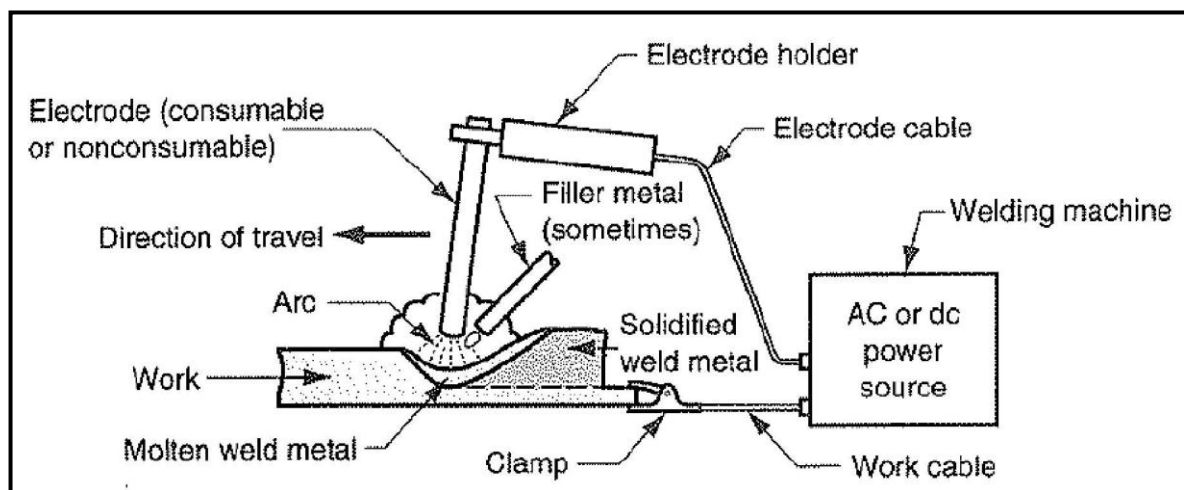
Schematic of a shielded metal arc welding process
